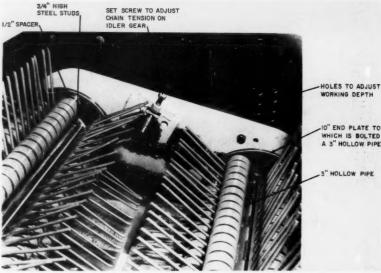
Details of the elliptical adjustable plate, idler gear, and chain drive.
